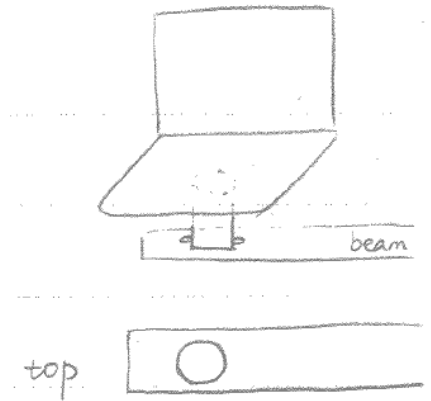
Seat attachment locked by “O-Ring” on the bottom of the seat
